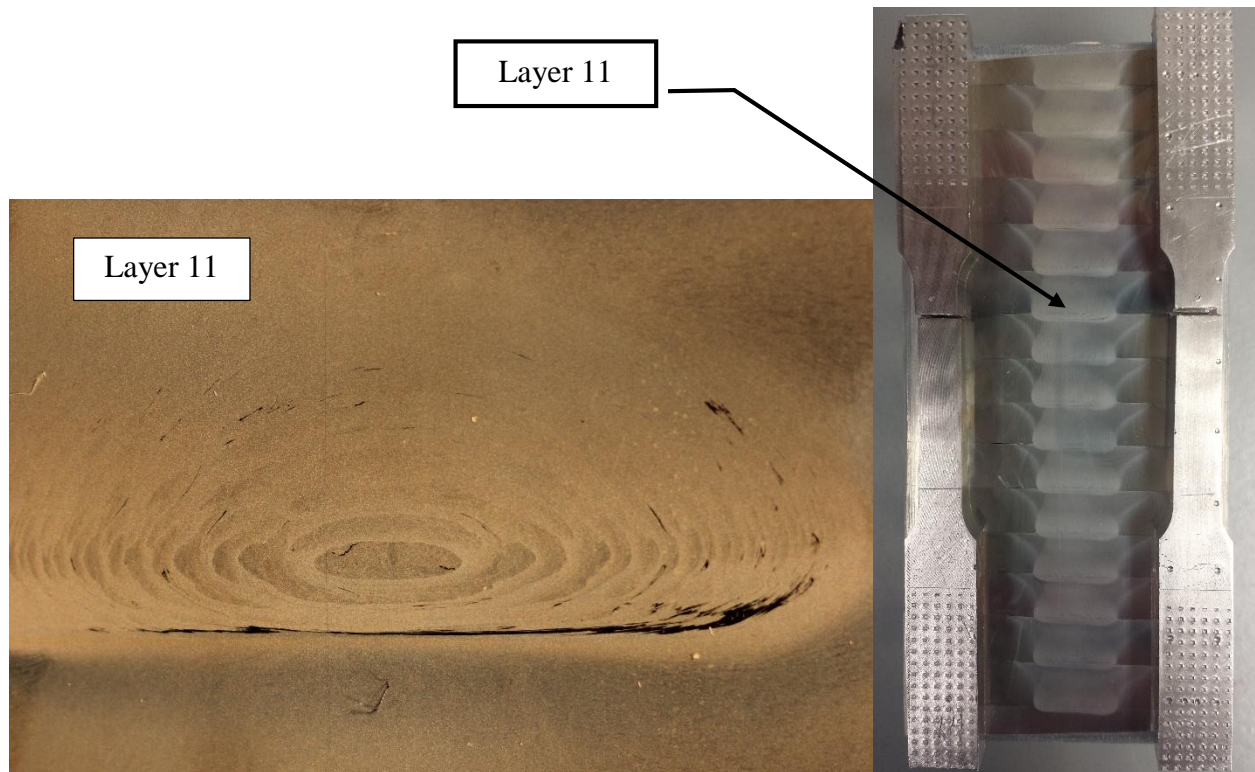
End Weld Major Cold Lapping in Layer 11
